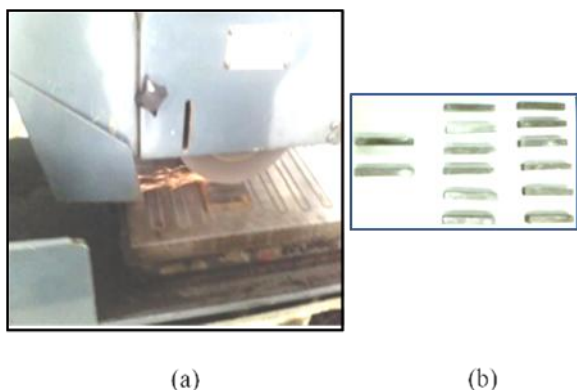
(a) Surface finishing of the specimens on surface grinding machine, (b) Specimens prepared by the machine.
